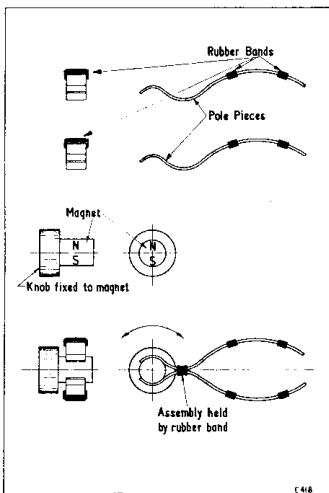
The component parts of, and a complete, picture shift assembly. This drawing is not intended to represent in detail any particular assembly at present available.
